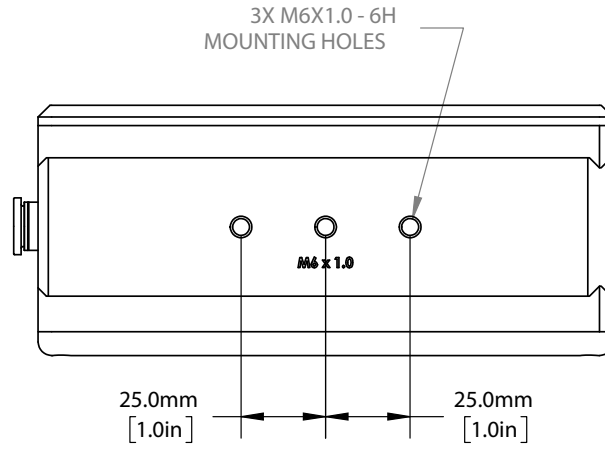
PM10K+ with Backscatter Shield M6 Mount Hole Locations
